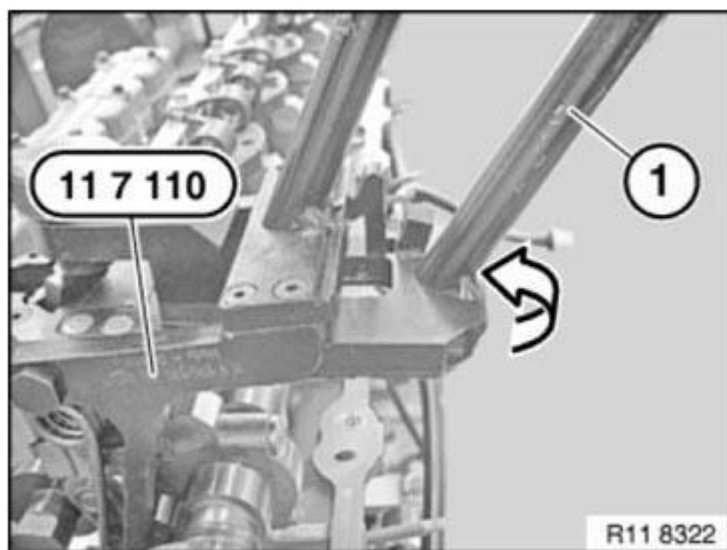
Preloading Return Spring On Special Tool (11 7 110)
